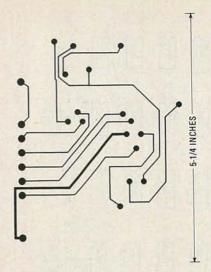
FOIL PATTERN for top of telephone adaptor board.
